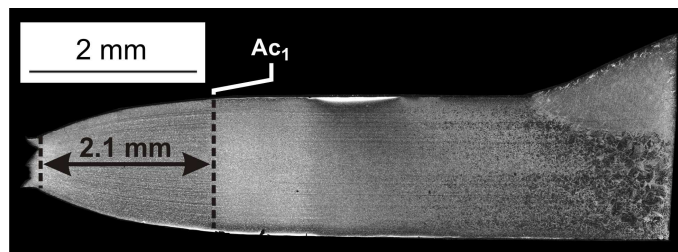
A longitudinal section of a weld tensile specimen that had a HAZ failure location. (High heat input weld).
